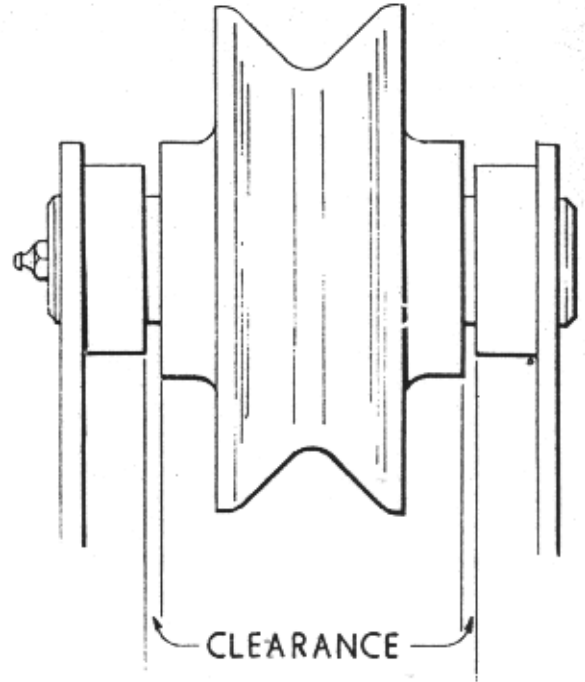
LOADCELL STRIKER GUIDE CLEARANCE
